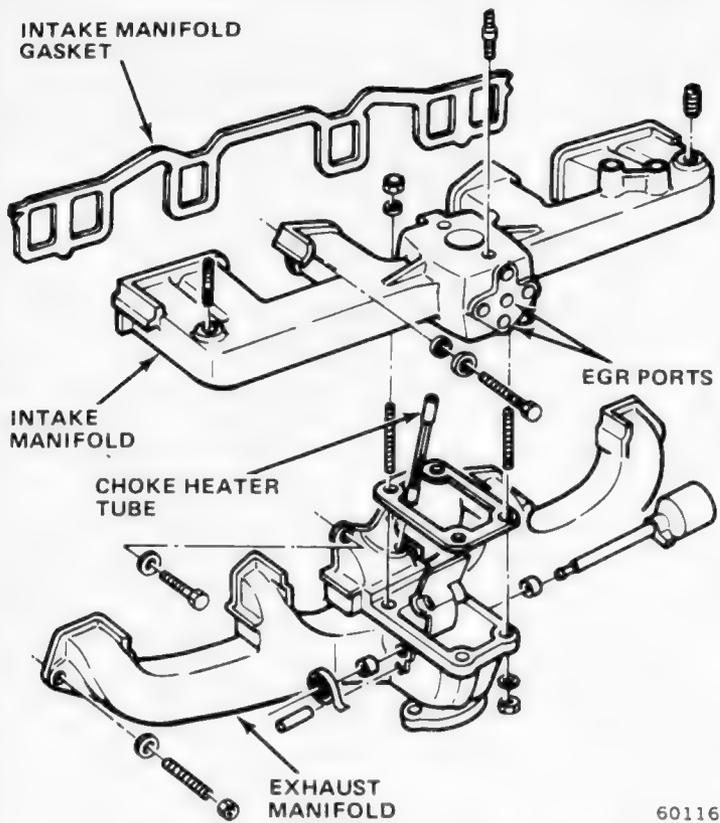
K-6 Exhaust Manifold—Four-Cylinder
